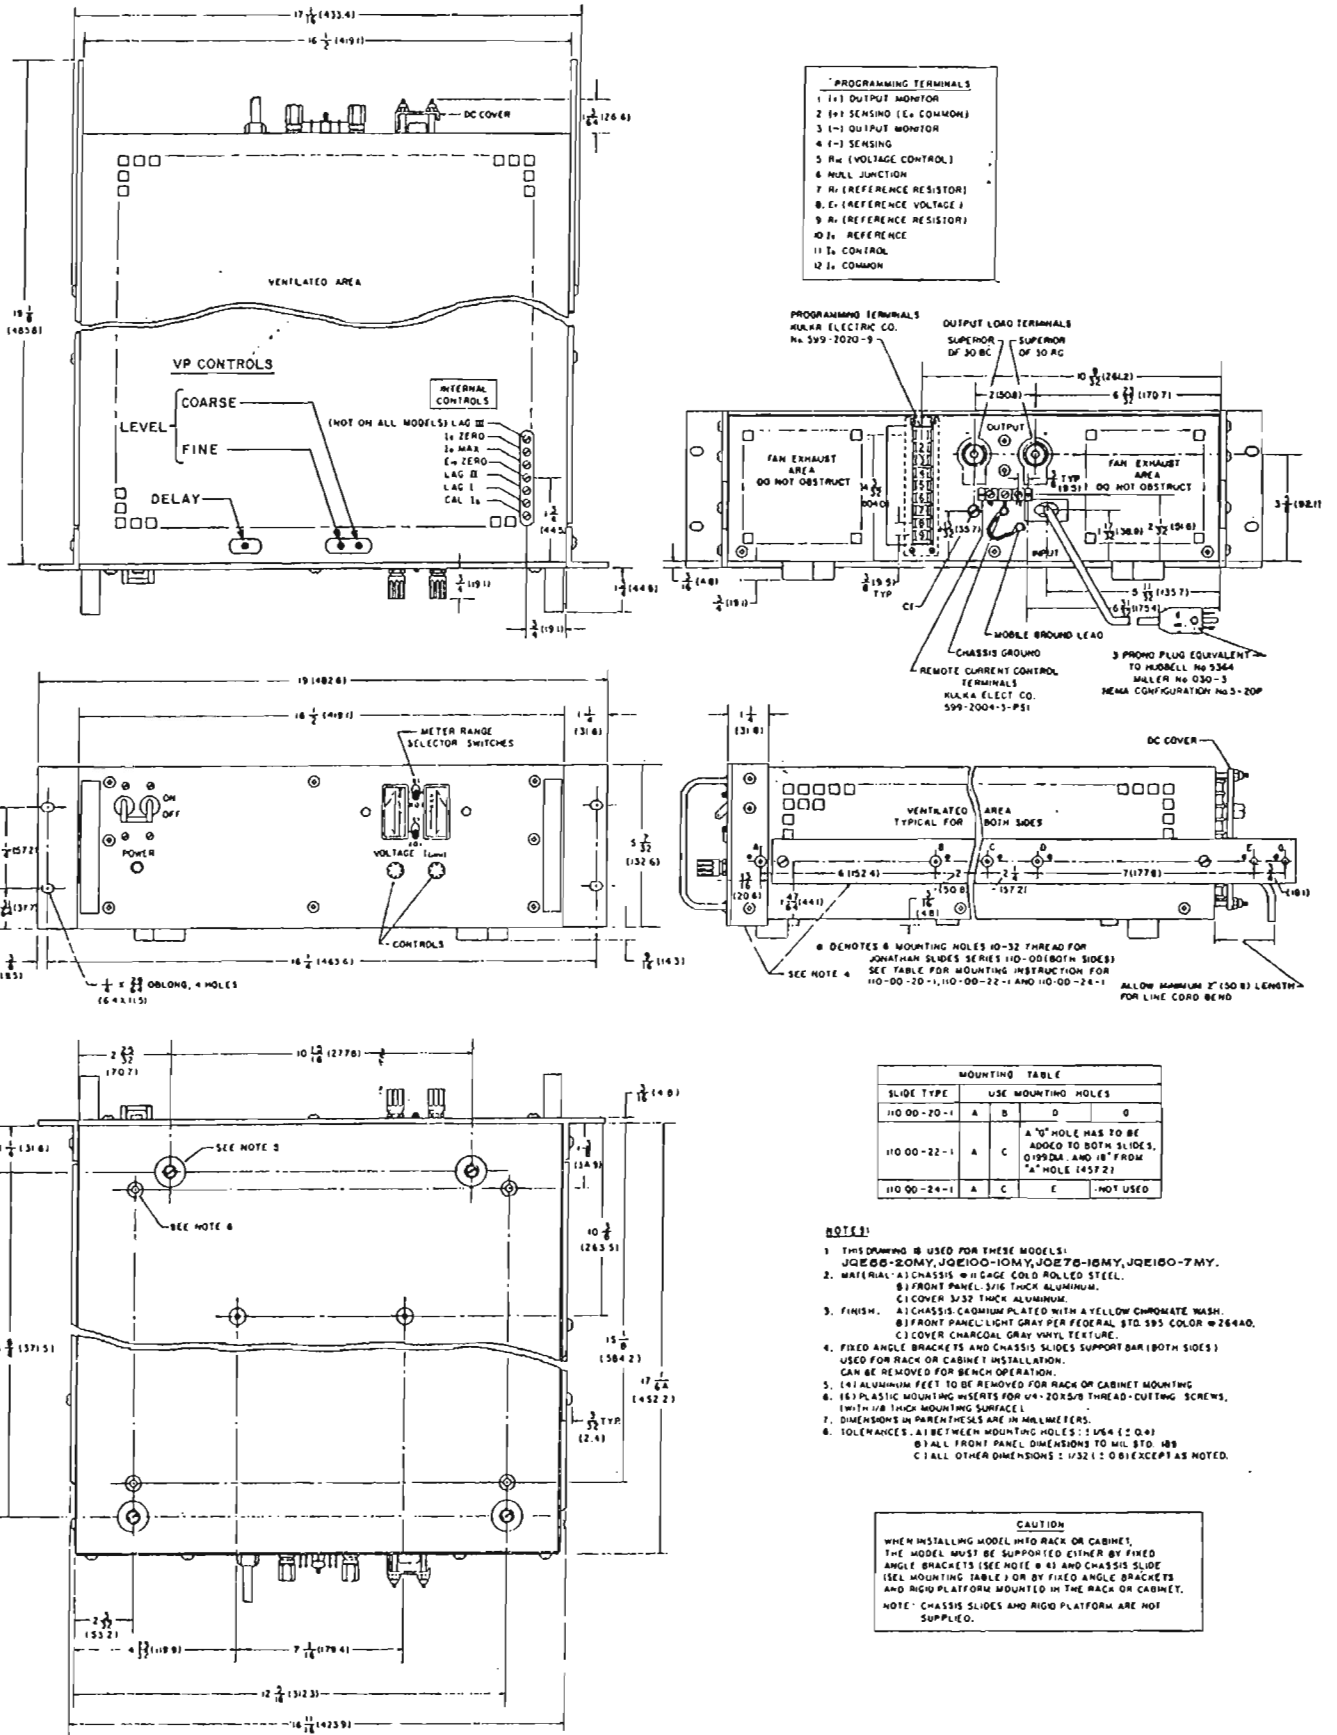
MECHANICAL OUTLINE DRAWING
